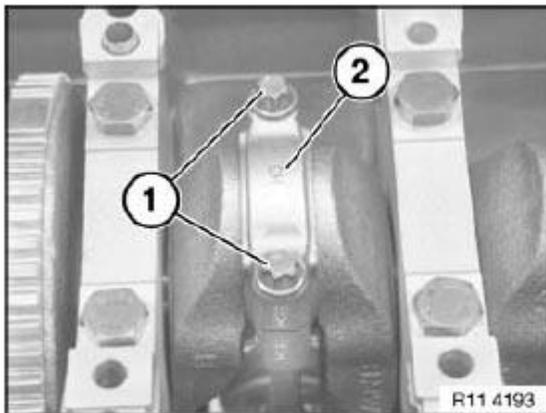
Identifying Conrod Bolts And Connecting Rod Bearing Cap
